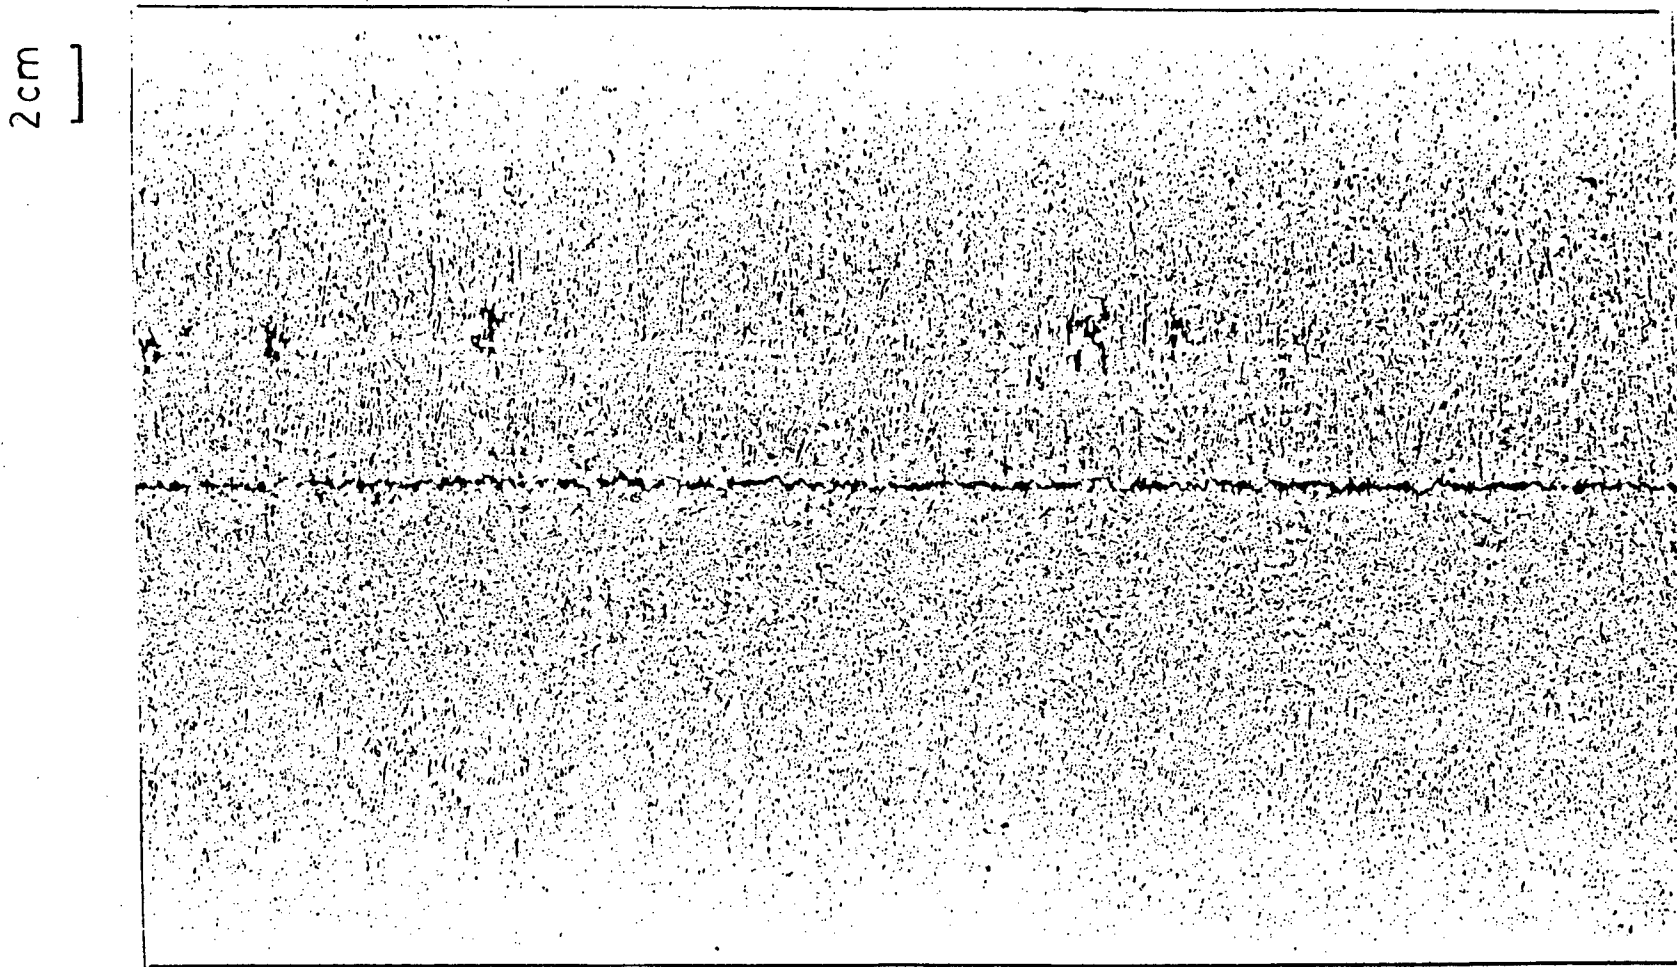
Sulfur Print of a Longitudinal Section ; Rating of Internal Cracks = 0.5.⁴⁶
